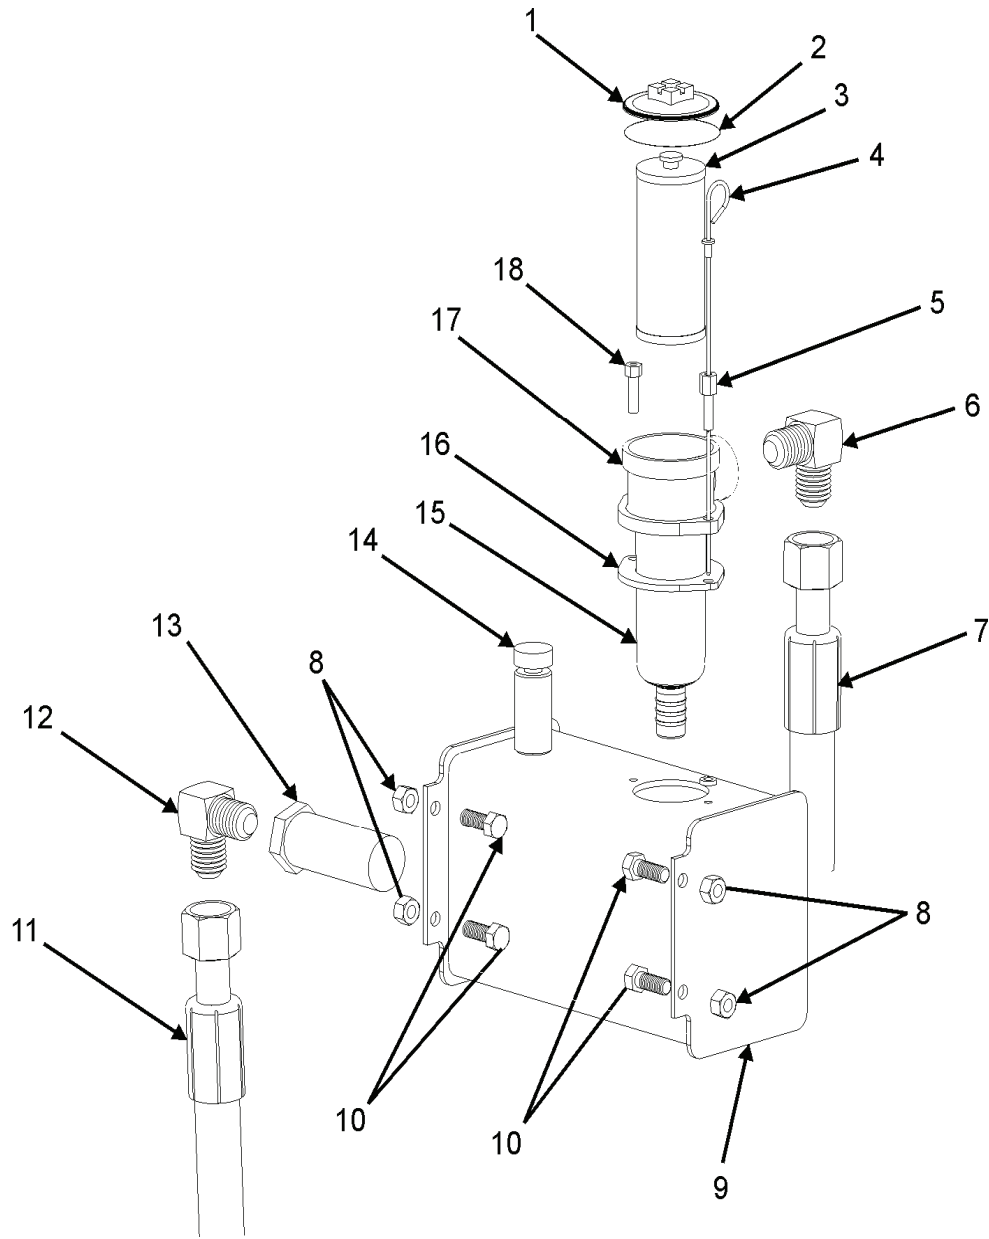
Hydraulic Tank Assembly (Removal and Installation)
